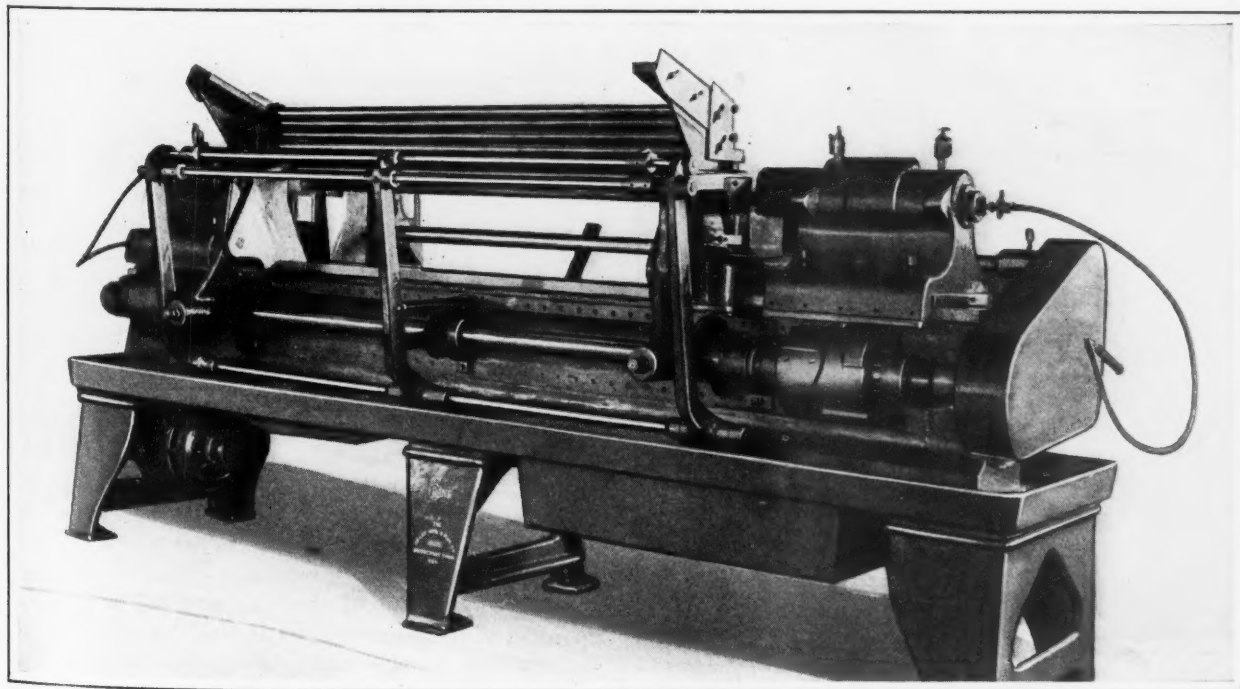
Grant Double-end Automatic Chamfering and Threading Machine
